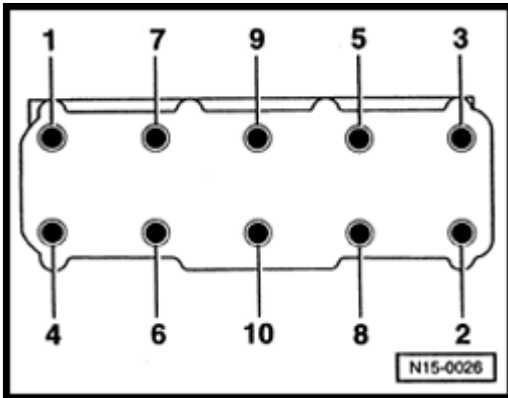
Identifying Cylinder Head Bolts Loosening Sequence
